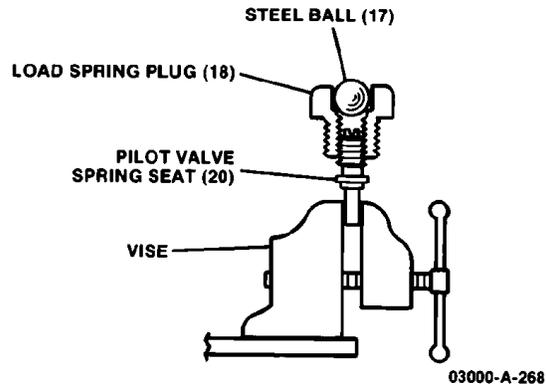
Removing Pilot Valve Spring Seat (20) and Steel Ball (17) from Loading Spring Plug (18)
